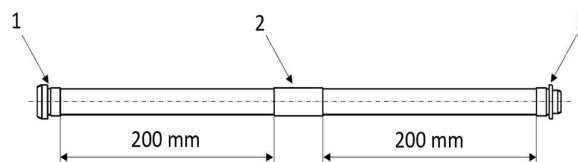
Experimental model with two pipes: 1 – cap; 2 – fitting; 3 – pressure connection.
